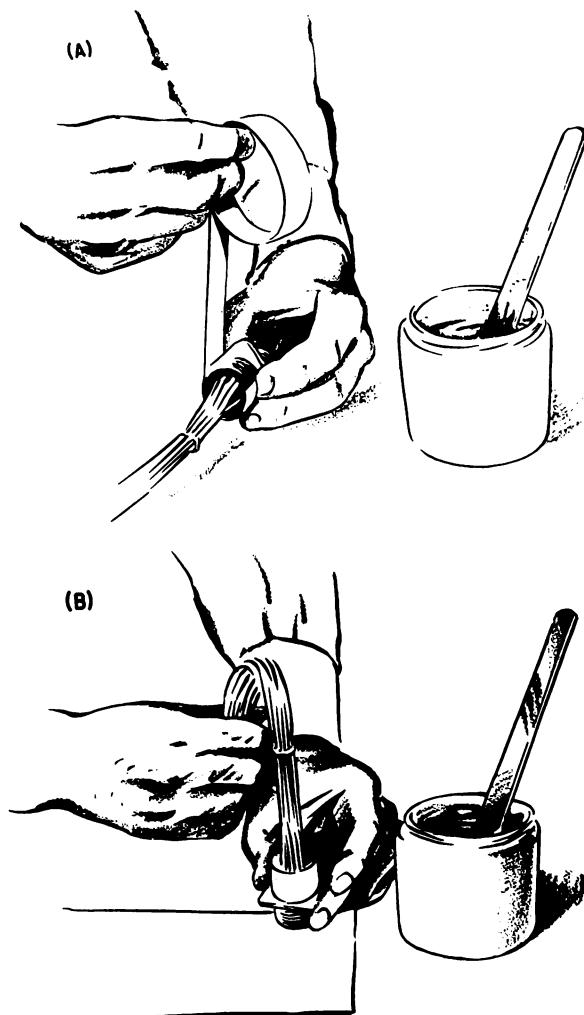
(A) Making mold from masking tape; (B) finished potted plug.
